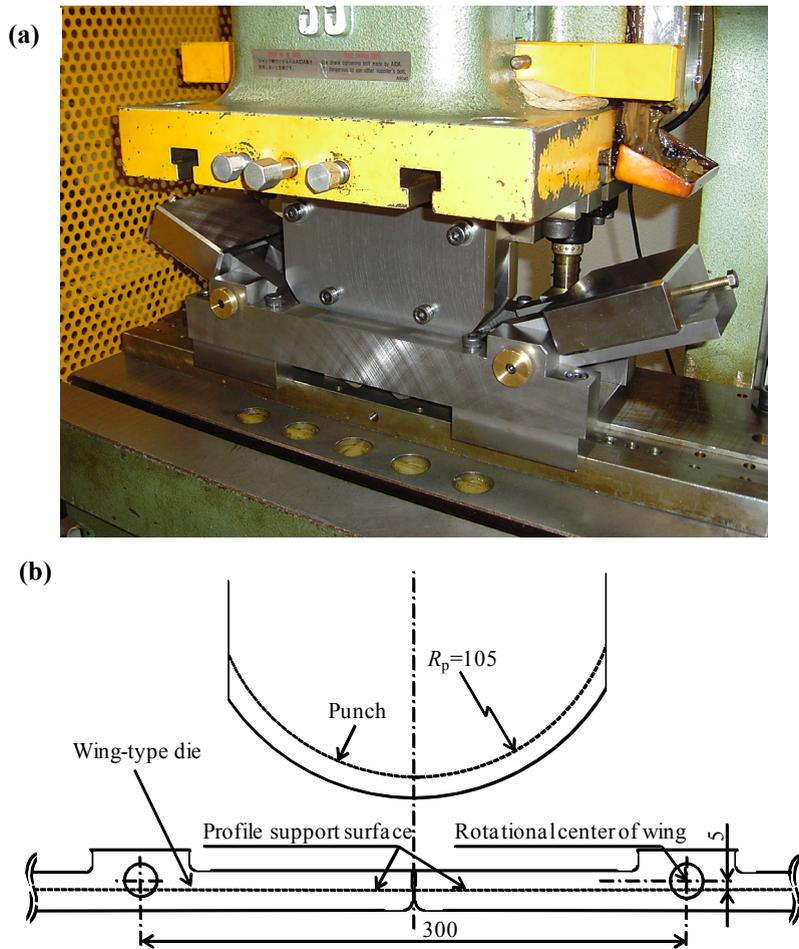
Press bending setup. (a) Appearance of bending die at lower dead point and (b) main parts and dimensions of tooling.
